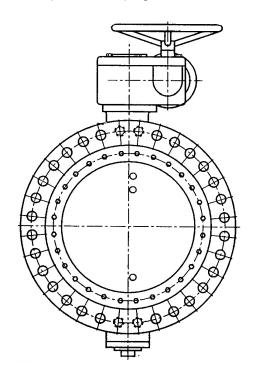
BUTTERFLY VALVE WITH ACTUATOR
